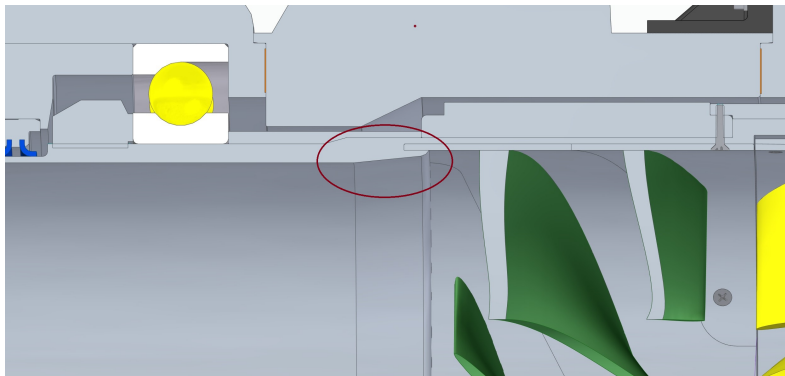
Circle indicates the area change between inlet and Rotor blades
